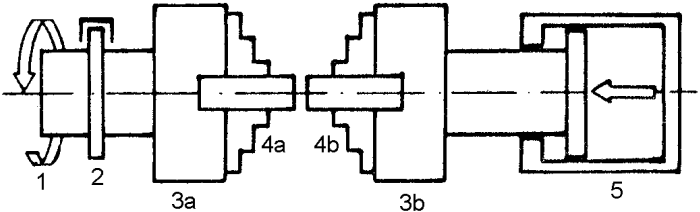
A schematic of continuous inducement friction welding machine [1, 5].
